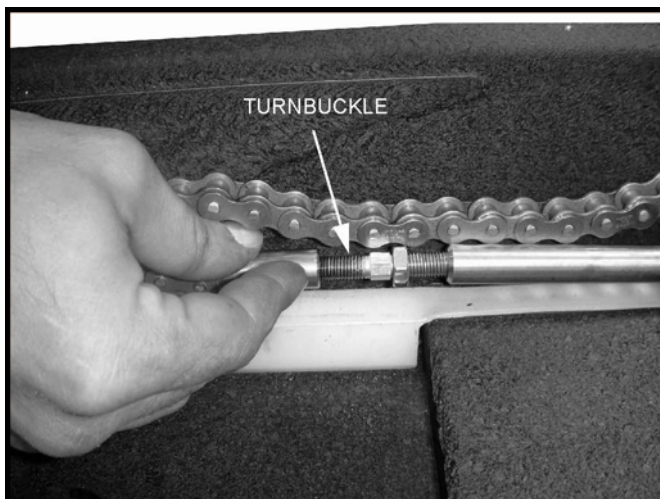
SPROCKET AND TURNBUCKLE ADJUSTMENT (LH SIDE SHOWN)
